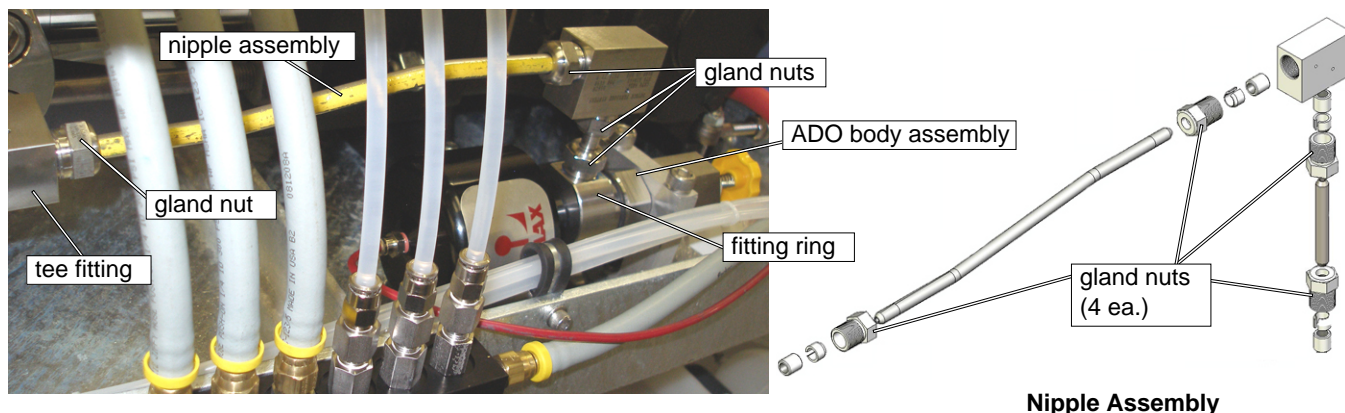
Hand-tighten the Gland Nut in the On/off Valve
